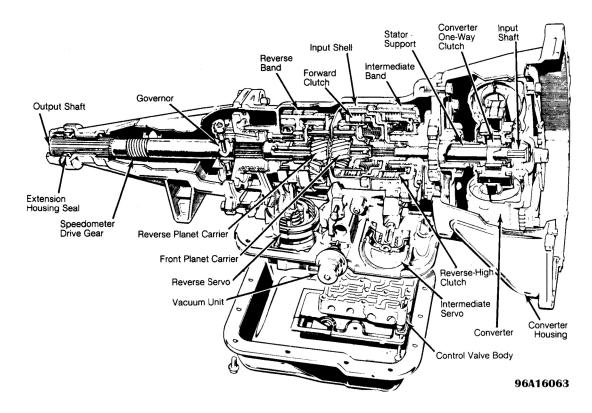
Cutaway View of C-3 Automatic Transmission Assembly Courtesy of FORD MOTOR CO.
